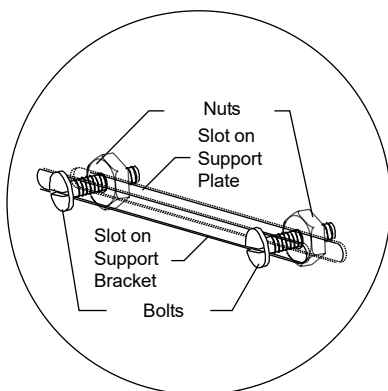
SLOT AREAS WITH BOLTS (#8 x 3/4") AND NUTS ASSEMBLY OF SUPPORT BRACKETS AND SUPPORT PLATE
